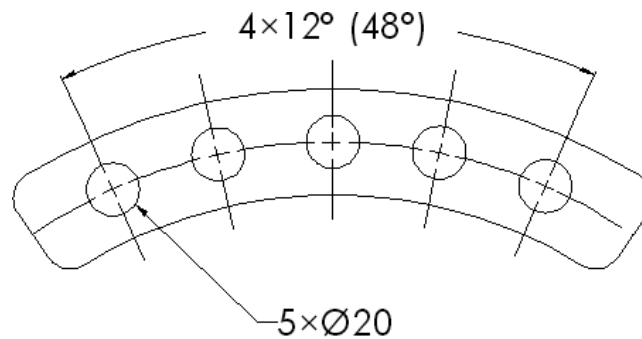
shows an example of a hole pattern dimensioned using polar dimensions.
